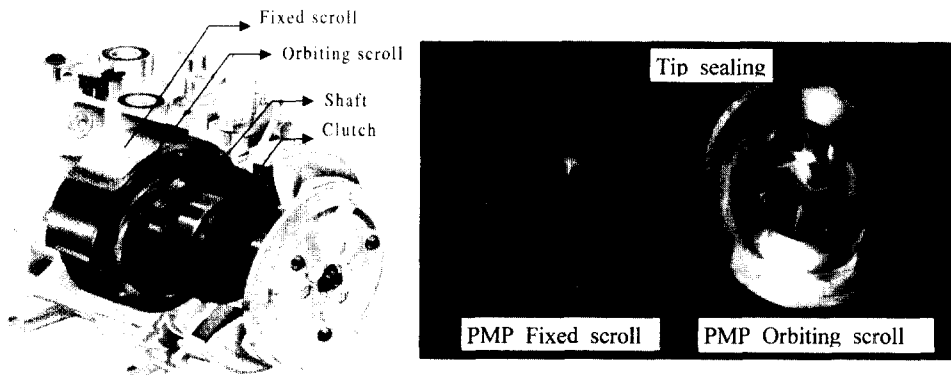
Cut view of scroll compressor for automobiles air conditioning system.
